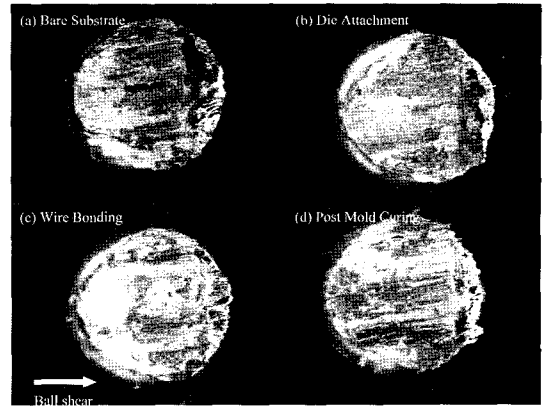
Morphology of solder ball joint fracture of OSP finished products during assembly conditions. (a) Bare substrate, (b) die attachment, (c) wire bonding, (d) post mold curing.
